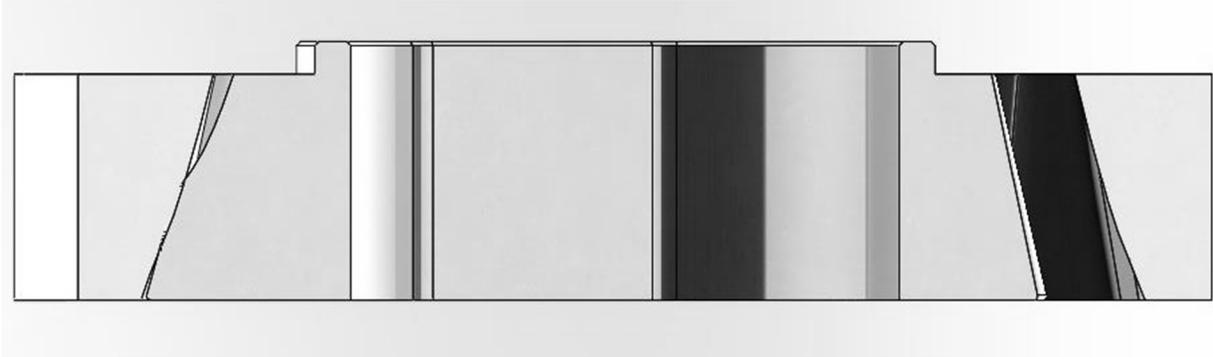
Cross Section 2: – Off plane cut section of outer rotor
